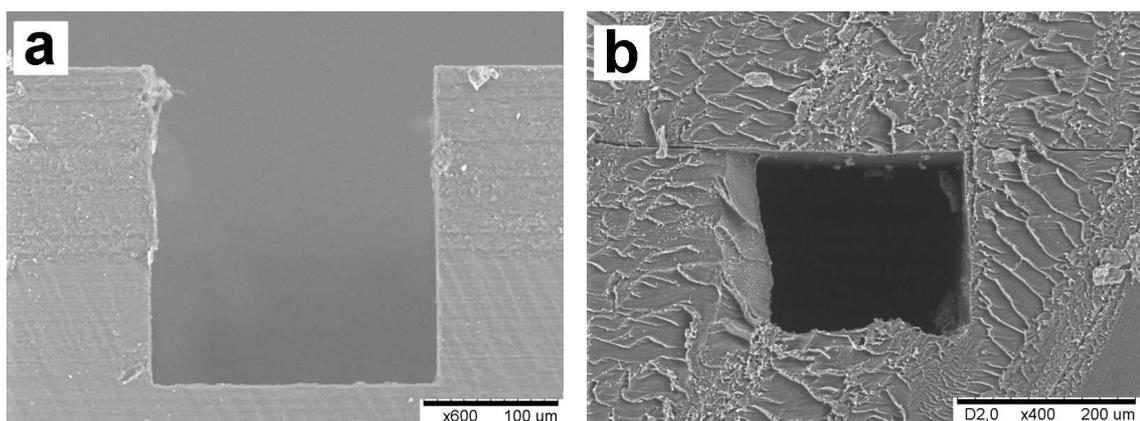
Cross sections of the milled microchannels: a) before bonding process, b) after bonding process,
